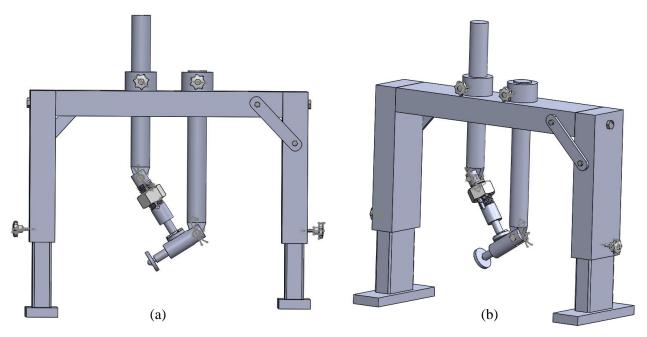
Side View (a) and Isometric View (b) of CAD Model of Slidometer Design 1
